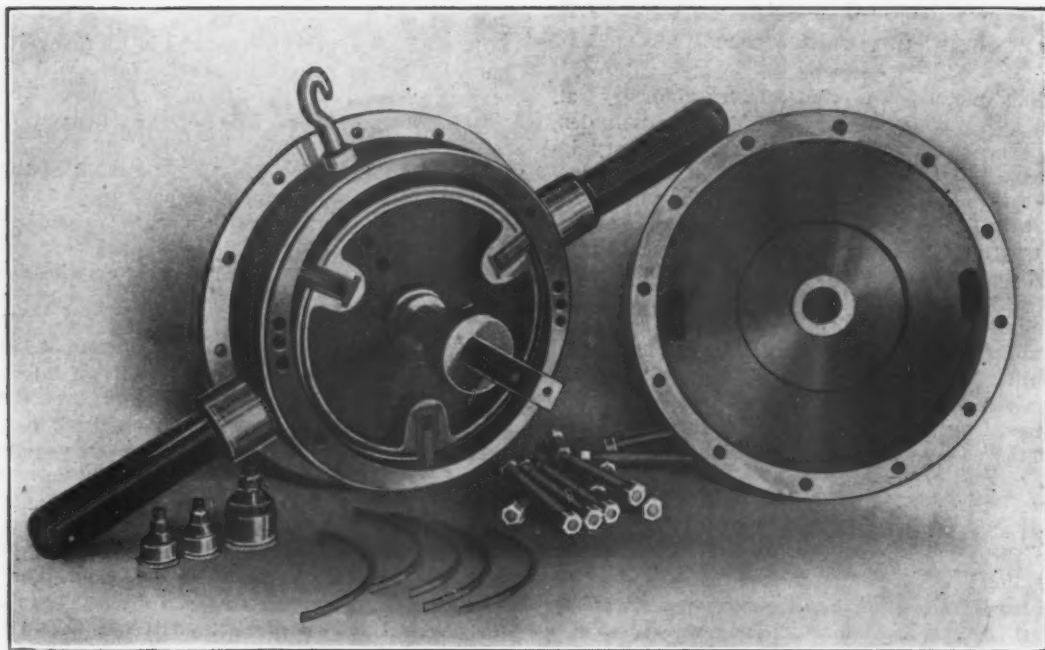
The Steam or Air Motor for Driving the Weinland Mechanical Cleaner.
